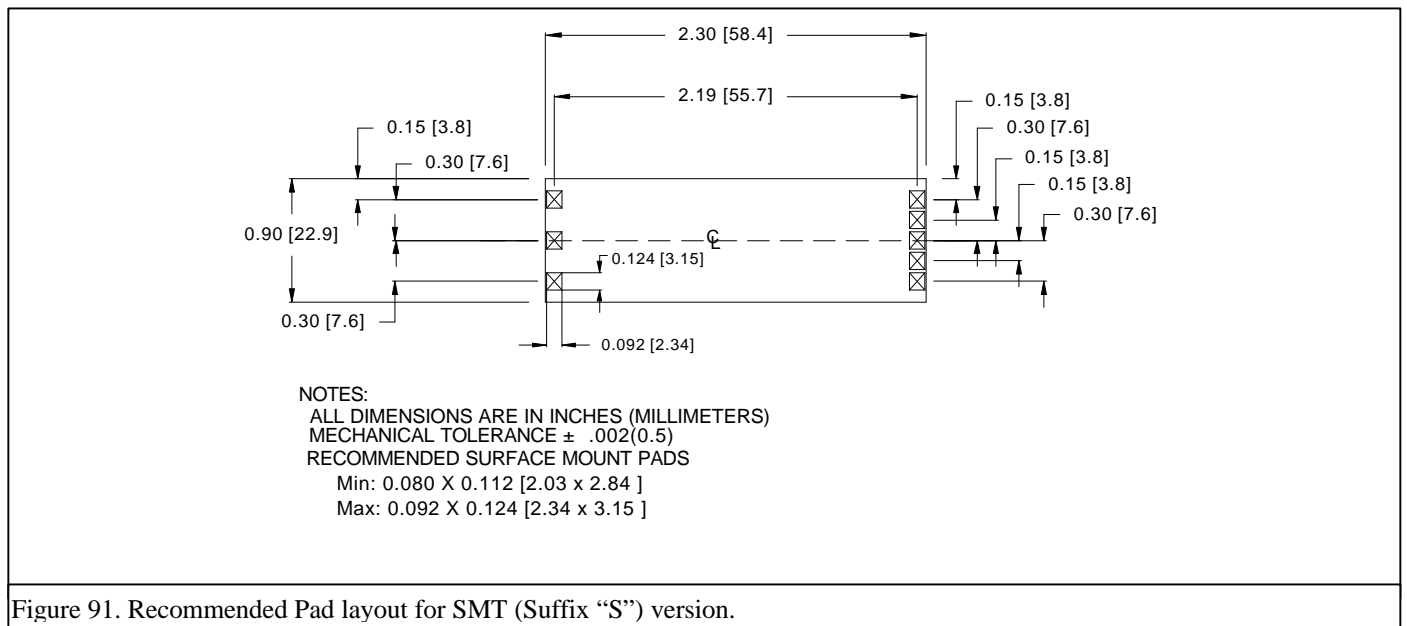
Recommended Pad layout for SMT (Suffix "S") version.
